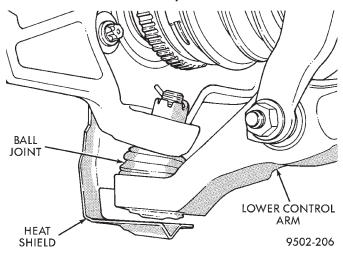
Ball Joint Heat Shield With 15 Inch Wheels
